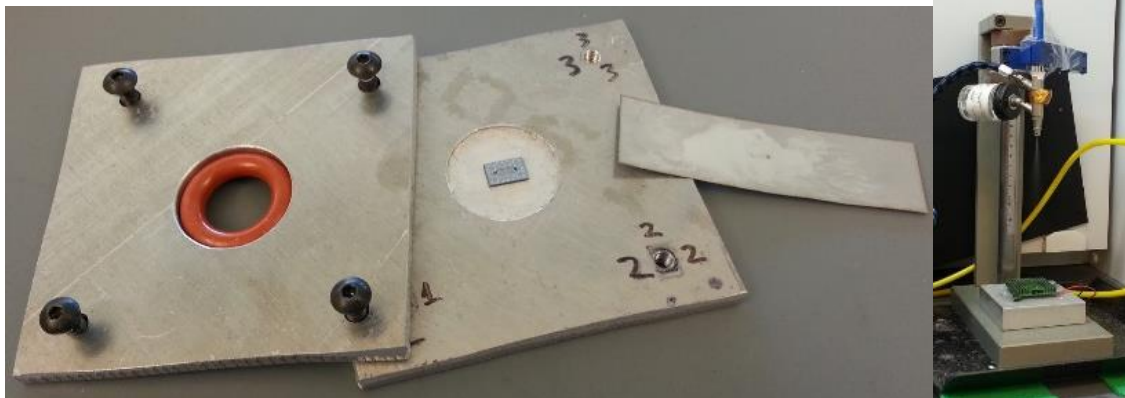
Photographs of (left) spray-coating fixture machined from steel, with accompanying shadow mask and die to be spray coated, and (right) vapor atomizer used for spray coating.
